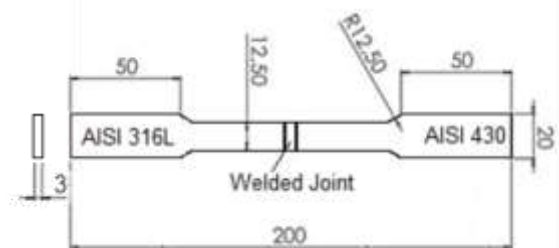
Flat tensile specimens according to ASTM E8 standard. Dimensions in mm [32]
